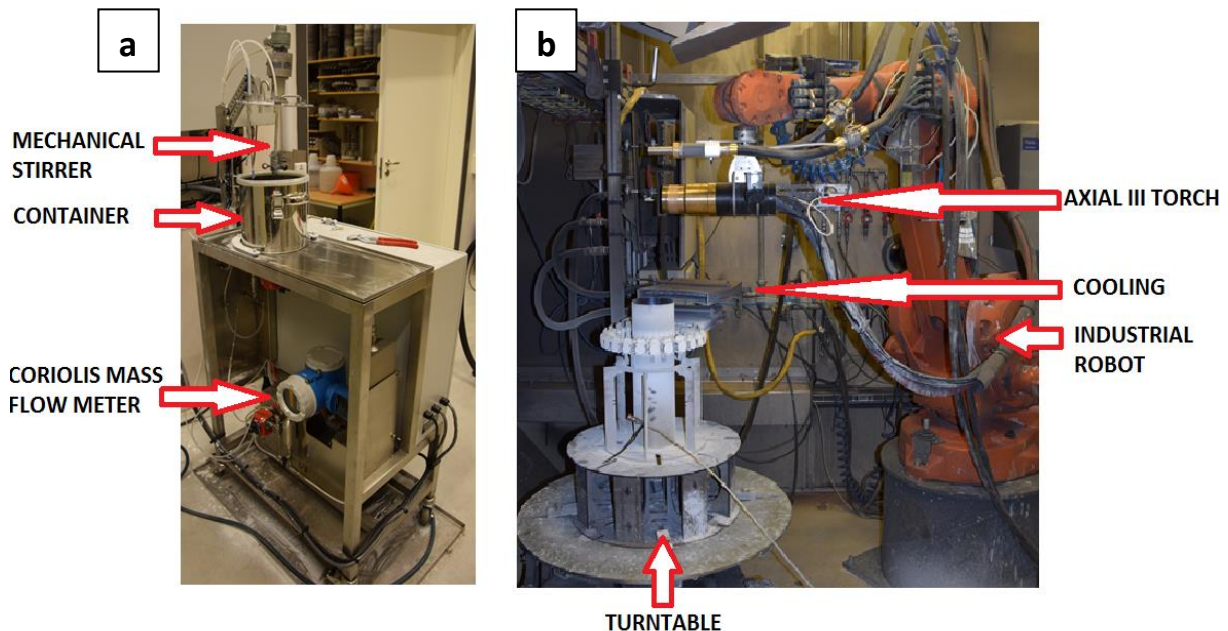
The SPS set-up equipped with Axial III plasma torch; a - commercial NanoFeed suspension injection system with peristaltic pump, b - plasma torch and sample fixture (University West, Trollhättan)
